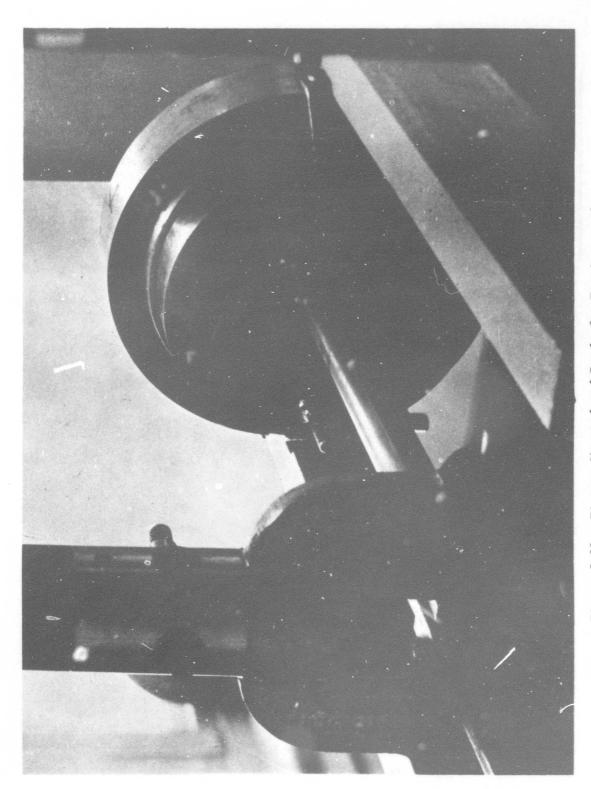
Fixture Mounted and Ready for Testing on the Instron
